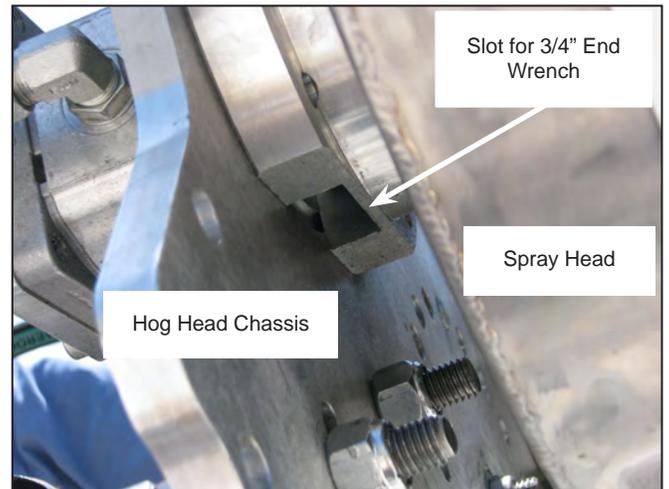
Location of slot in thru-shaft motor mounted on hog head for 3/4" open end wrench.
